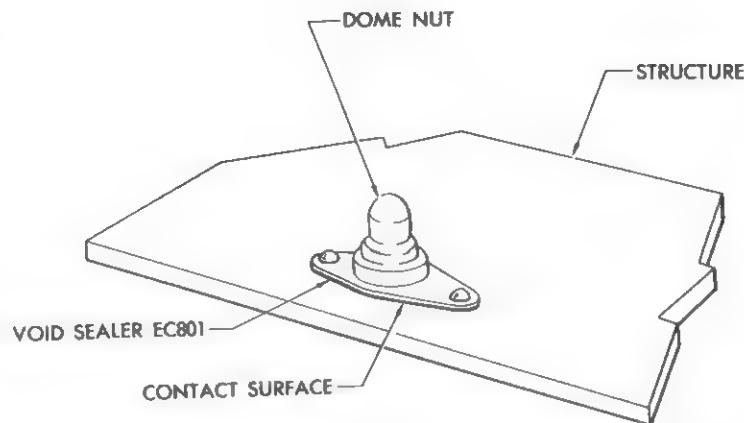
Installation of Fittings and Fasteners in a Fueltight Area
